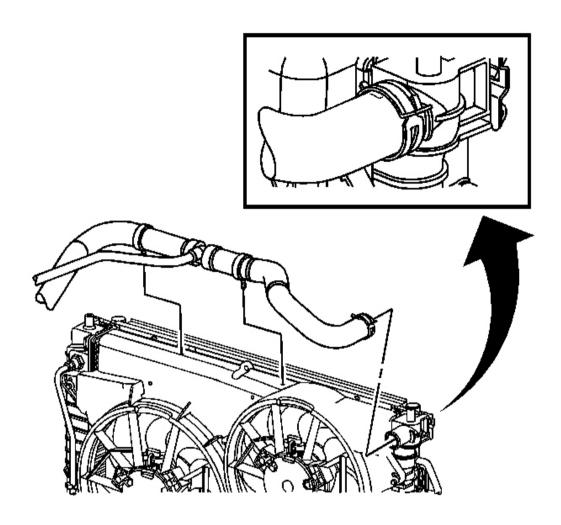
View Of Radiator Hose Courtesy of GENERAL MOTORS CORP.
